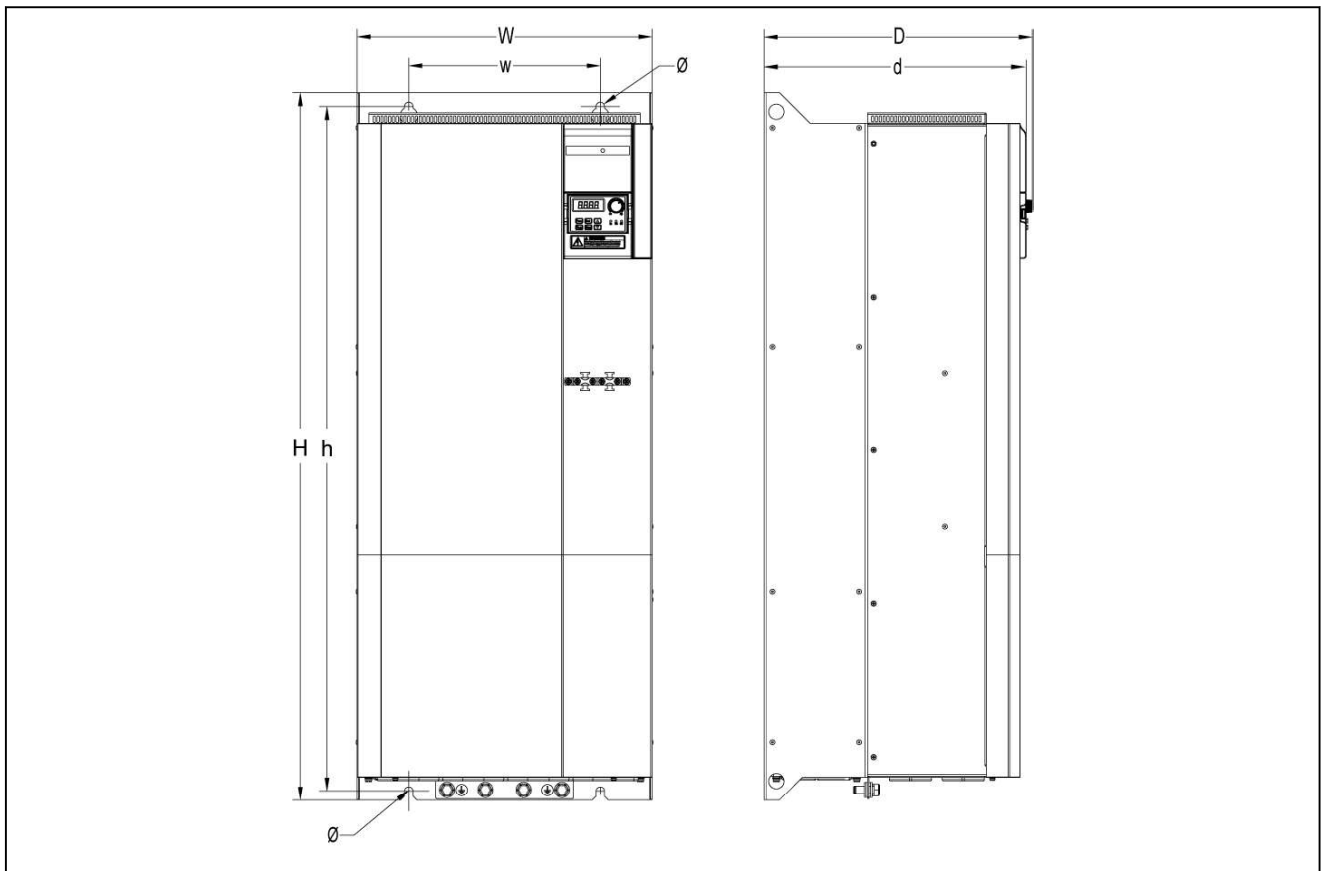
VFC 5610 110K...132K dimensions figure
